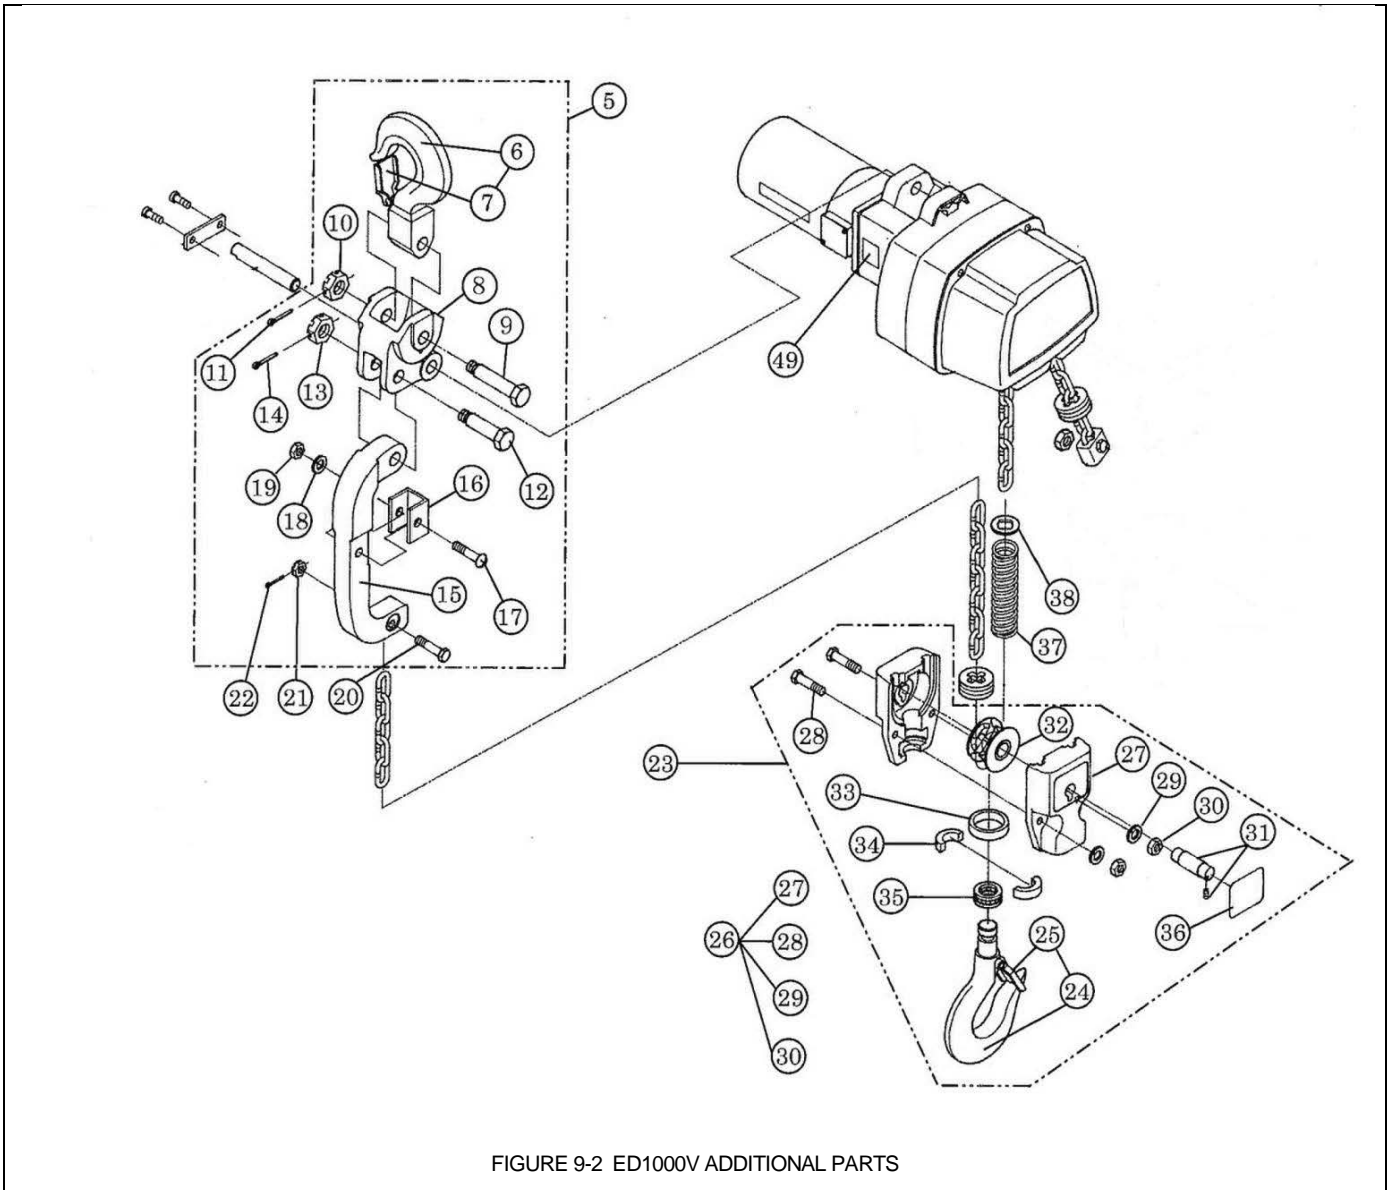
ED1000V ADDITIONAL PARTS
